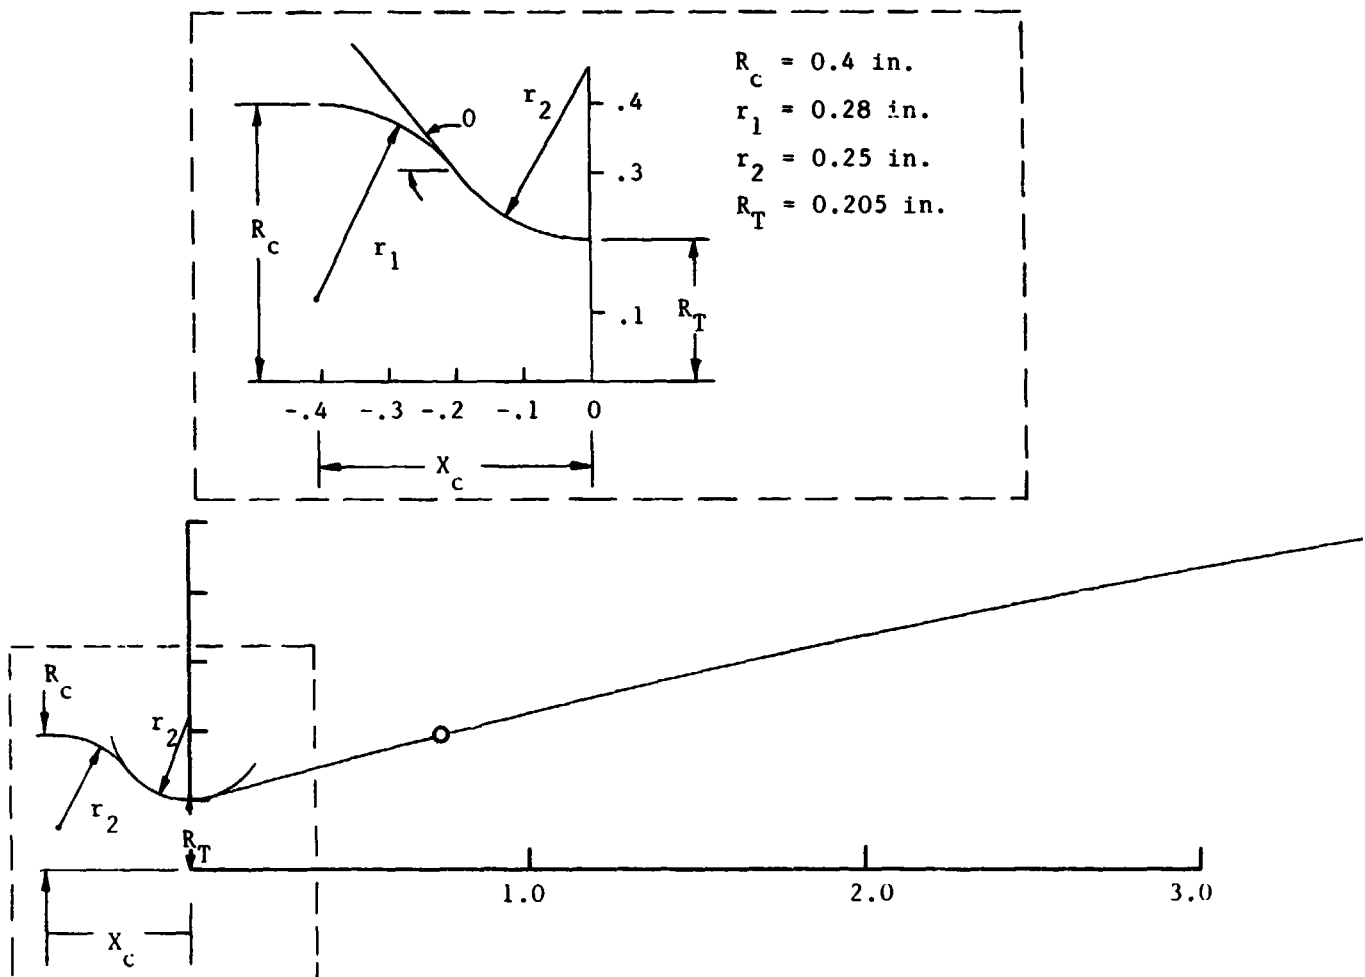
Vernier Engine Combustion Chamber Geometry
